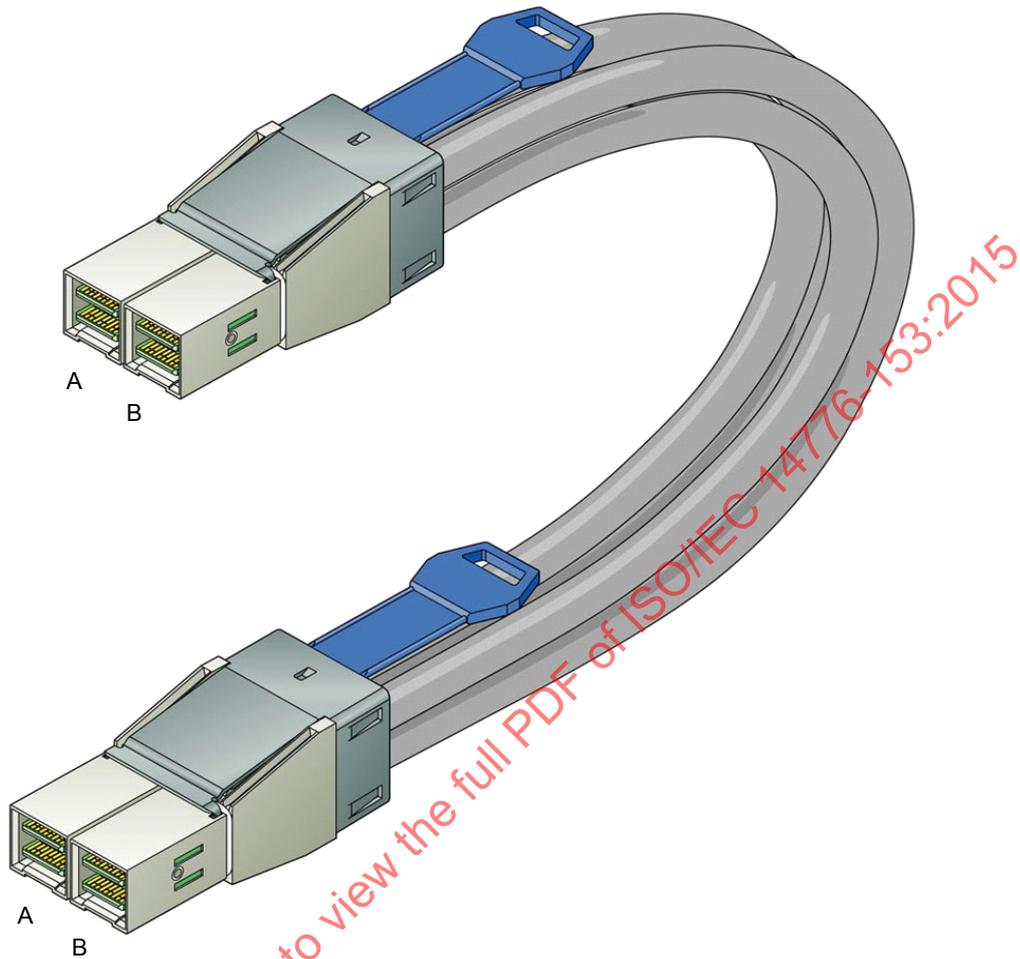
SAS external cable assembly with Mini SAS HD 8x cable plug connectors
